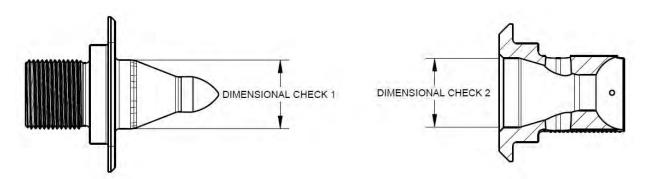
WING PIN DIMENSIONAL CHECKS.
